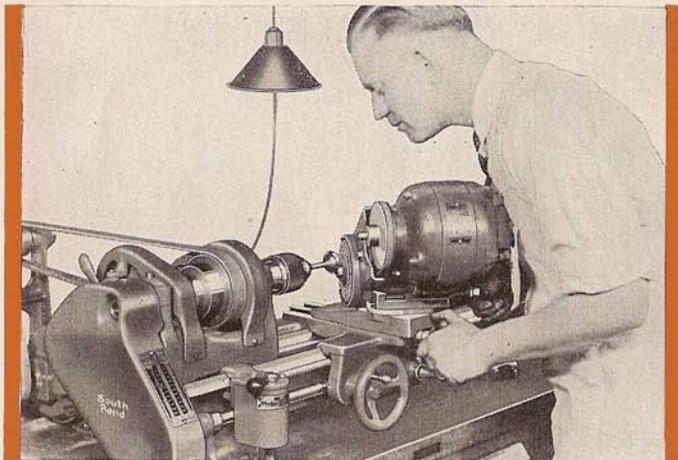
Grinding a Valve in the "Workshop" Lathe.
